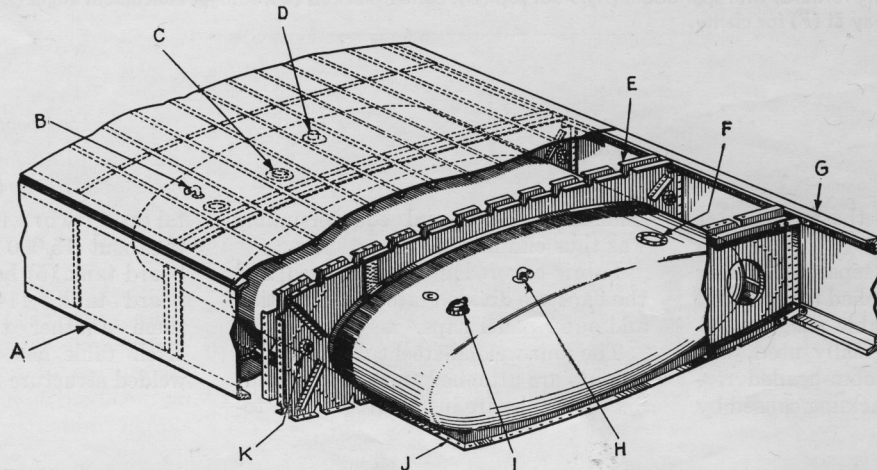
The installation of the Avro Lancaster outboard fuel tank is depicted in this cutaway sketch, showing front spar (A); refueling attachment (B); fuel gauge (C); fuel pump (D); tank bearer (E); inspection panel (F); rear spar (G); vent pipe attachment (H); filler cap (I); tank access door (J); and tank strap attachment (K).
